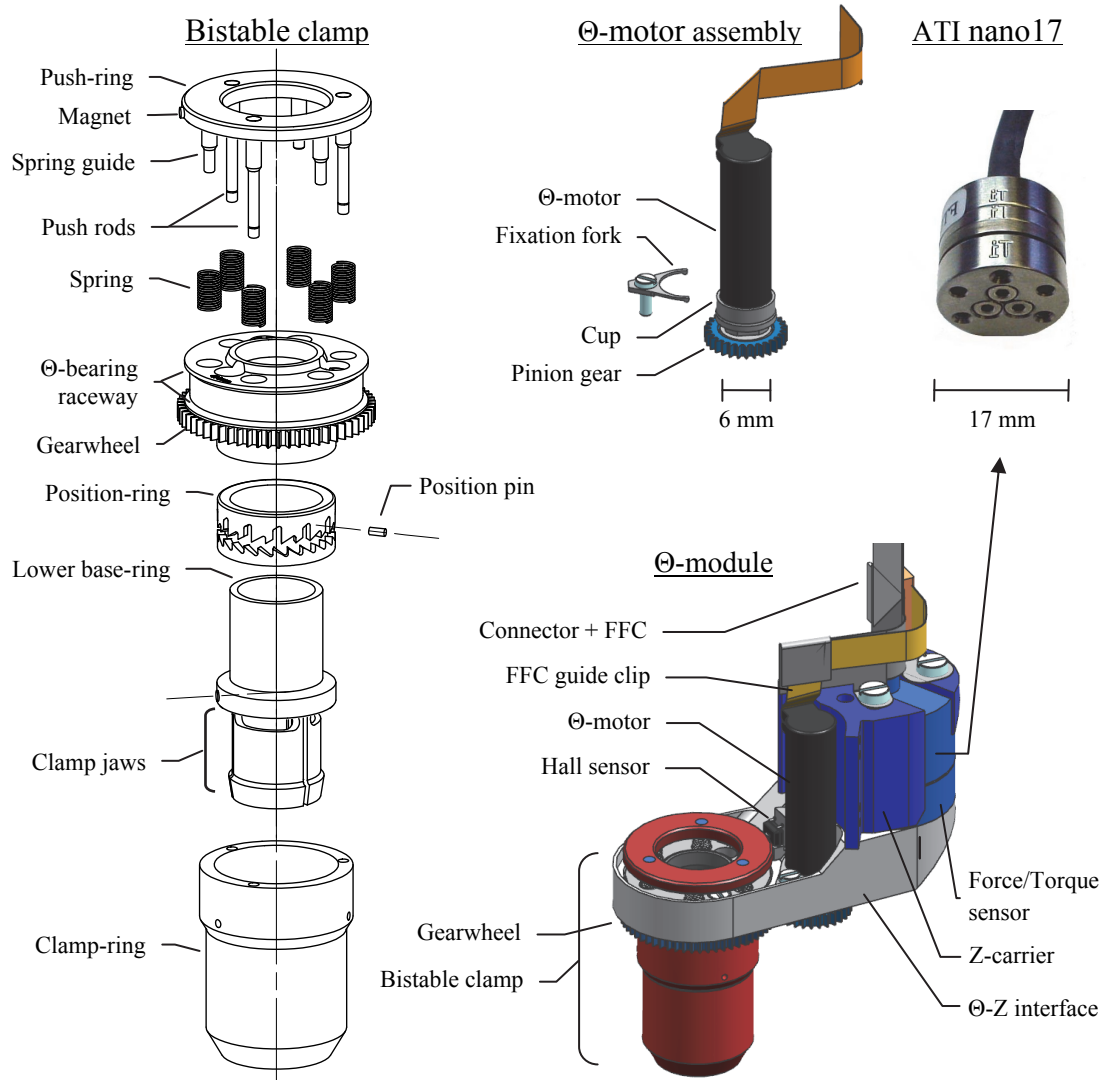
/ The bistable clamp in exploded view on the left, the Θ -module on the right below. On top in the middle; the Θ -motor is clamped to the Θ -Z interface by the fixation fork. To measure forces, the smallest commercially available force/torque sensor is uses (upper right corner).
